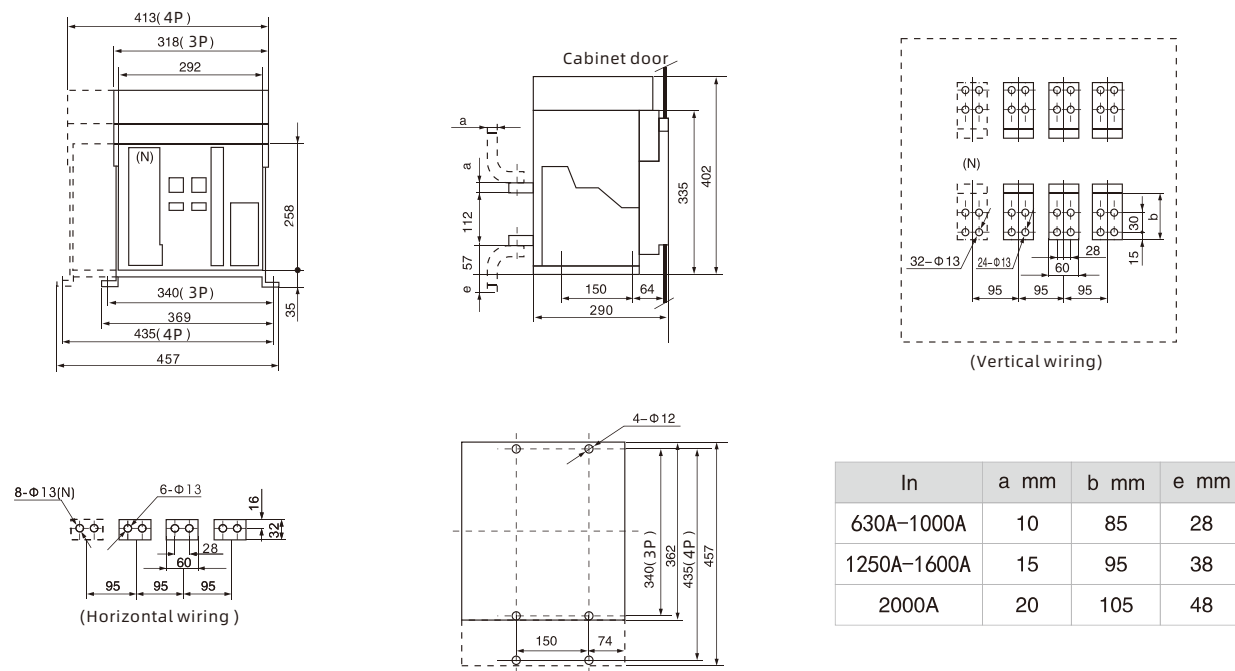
Fixed circuit breaker overall and installation dimensions (ARW1-2000, 2000/4)
